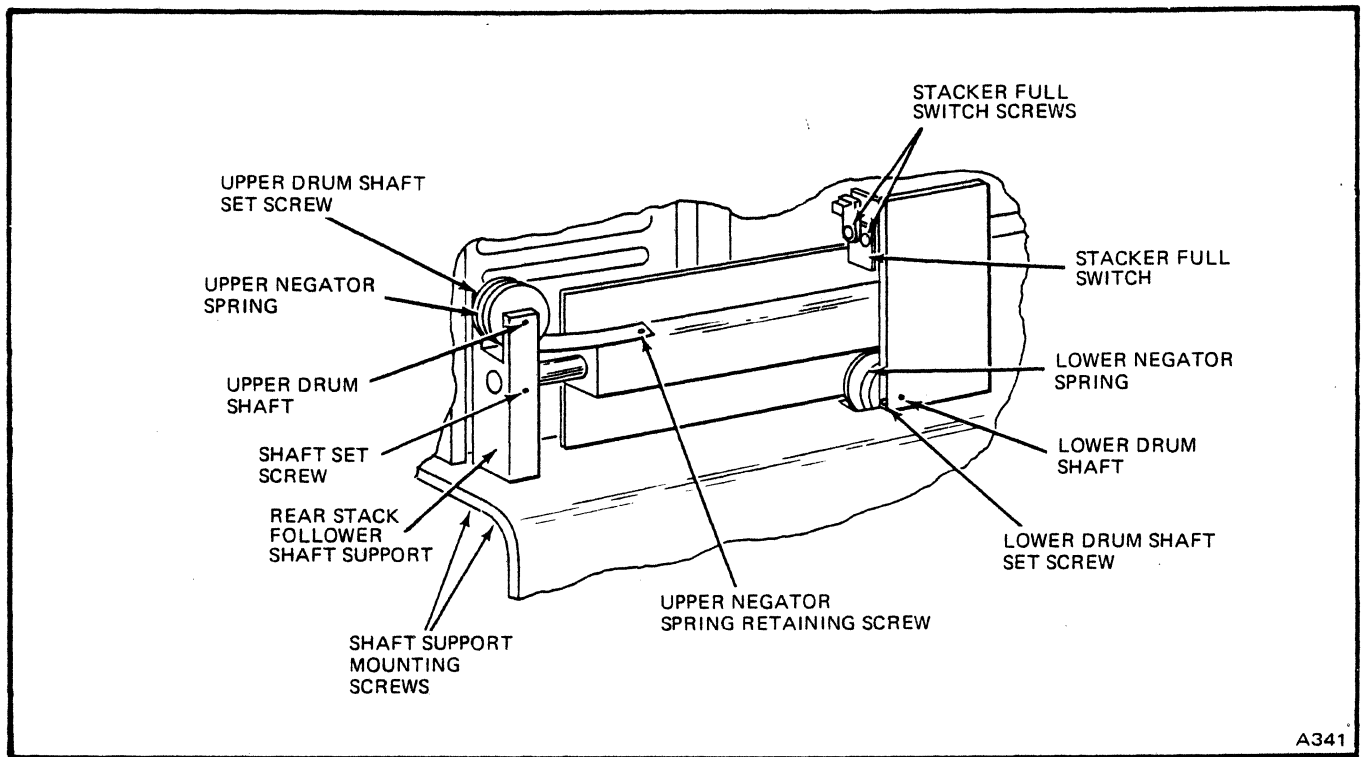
Stacker Negator Spring Replacement, Rear View
